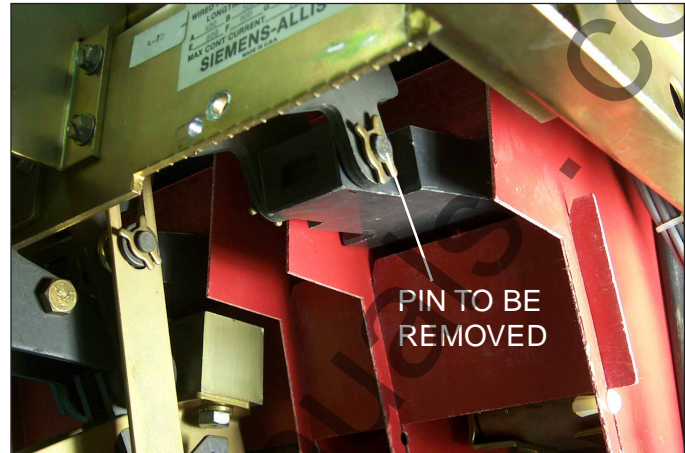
Closing Cam Pin to be Removed from the Breaker.
